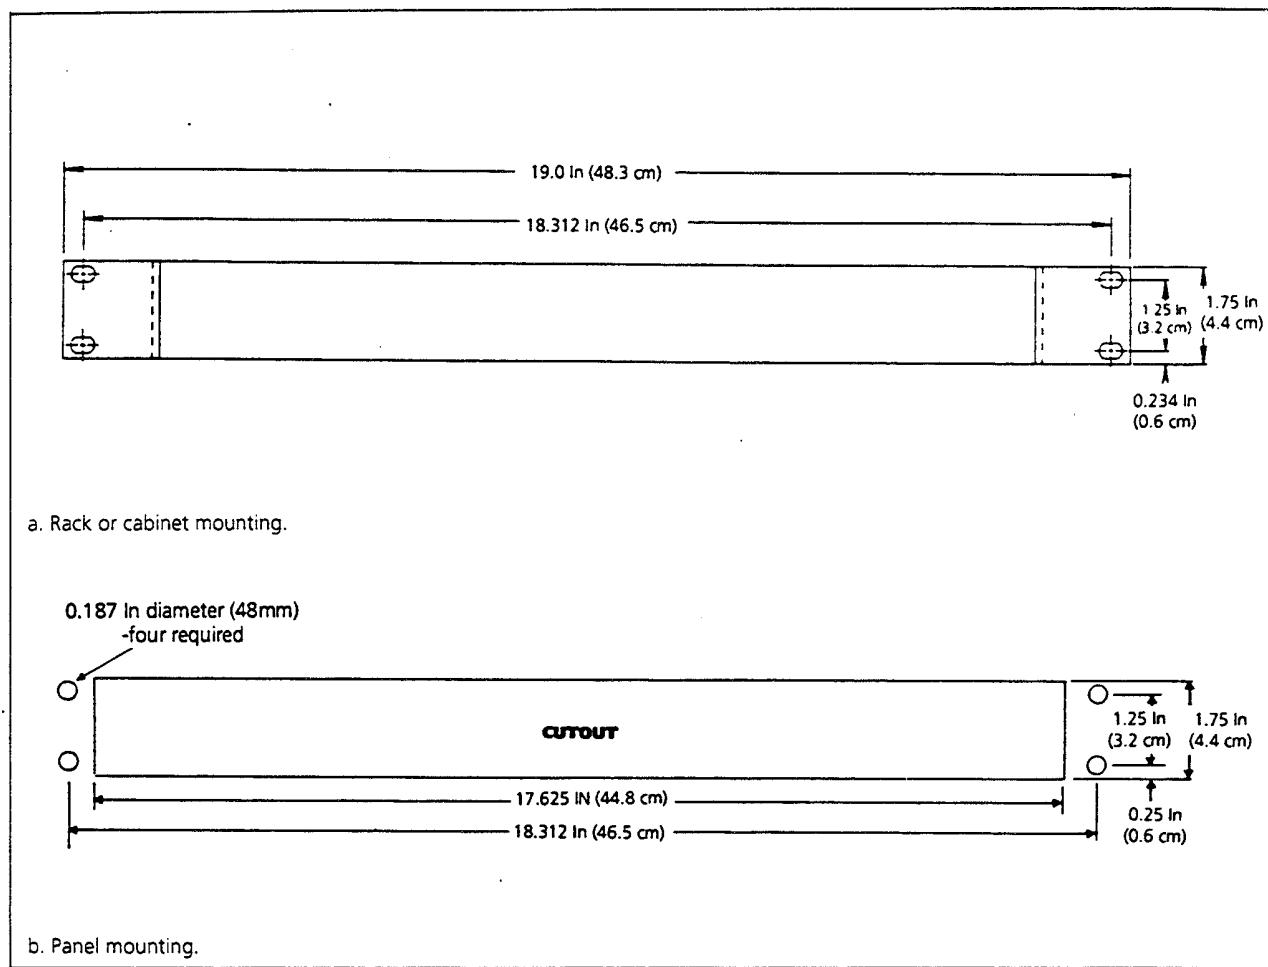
Mounting dimensions, 1U chassis for RFL 9720 Digital Pilot Wire Interface
